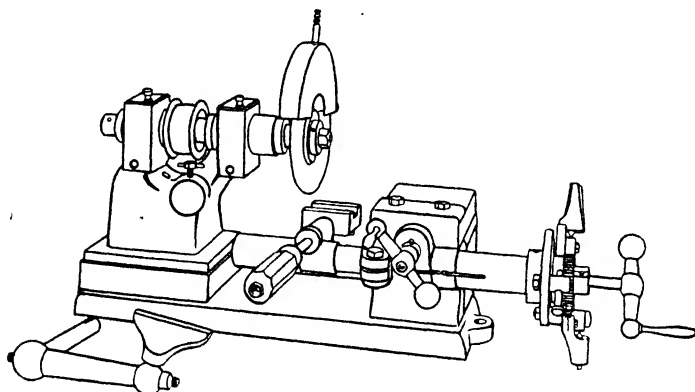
Sawing machine used for cutting rough stones into small plates of equal thickness; at the left-hand side toolrest for truing the disc
